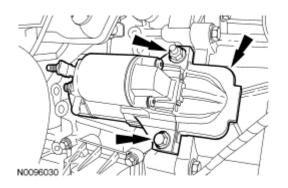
Locating Starter With Bolts And Studs Courtesy of FORD MOTOR CO.
